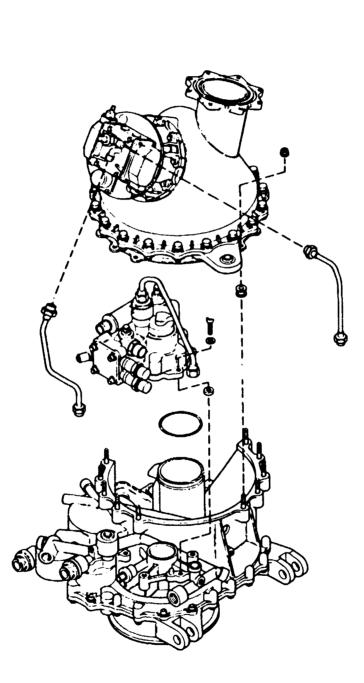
SRB APU exhaust dome and fuel pump - exploded parts.
